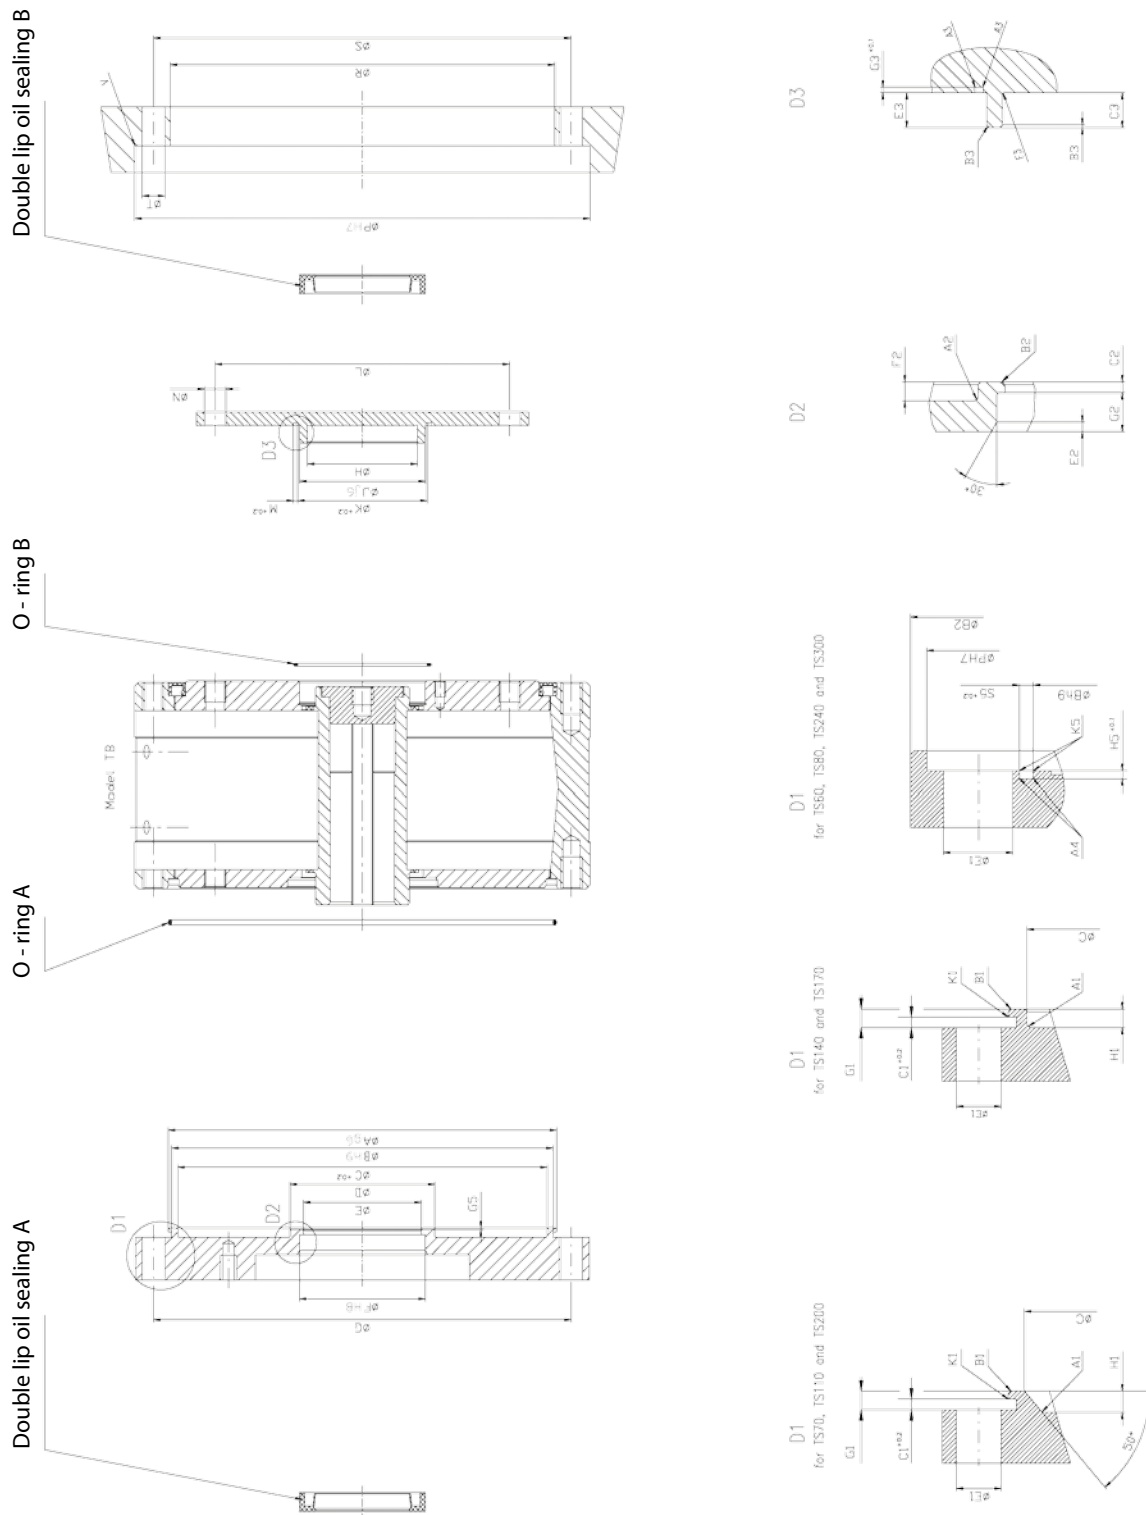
Dimensions for input and output flanges of TwinSpin gear T series
